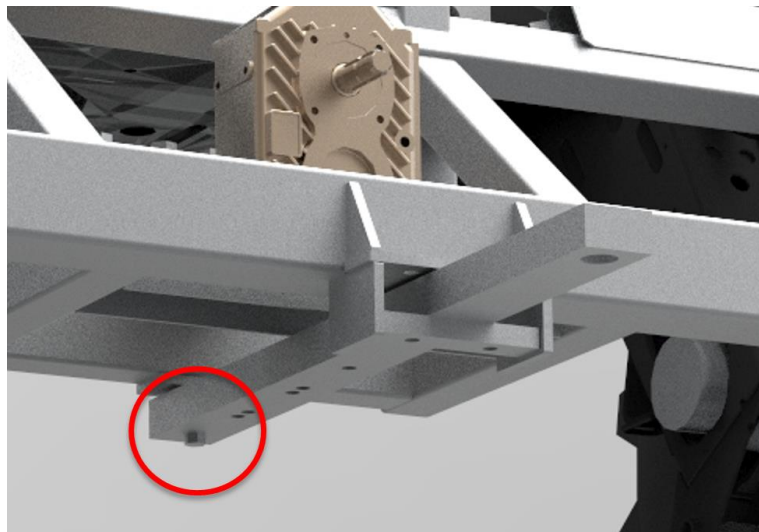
Drawbar position when installed. Main drawbar bolt circled in red.
